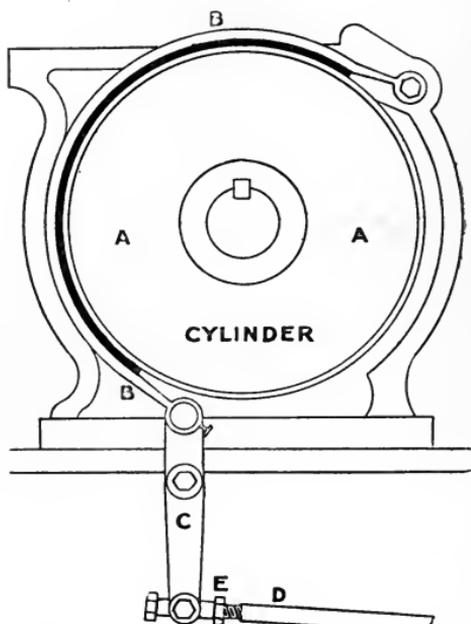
SHOWING BRAKE ON RATCLIFF'S MACHINE.
